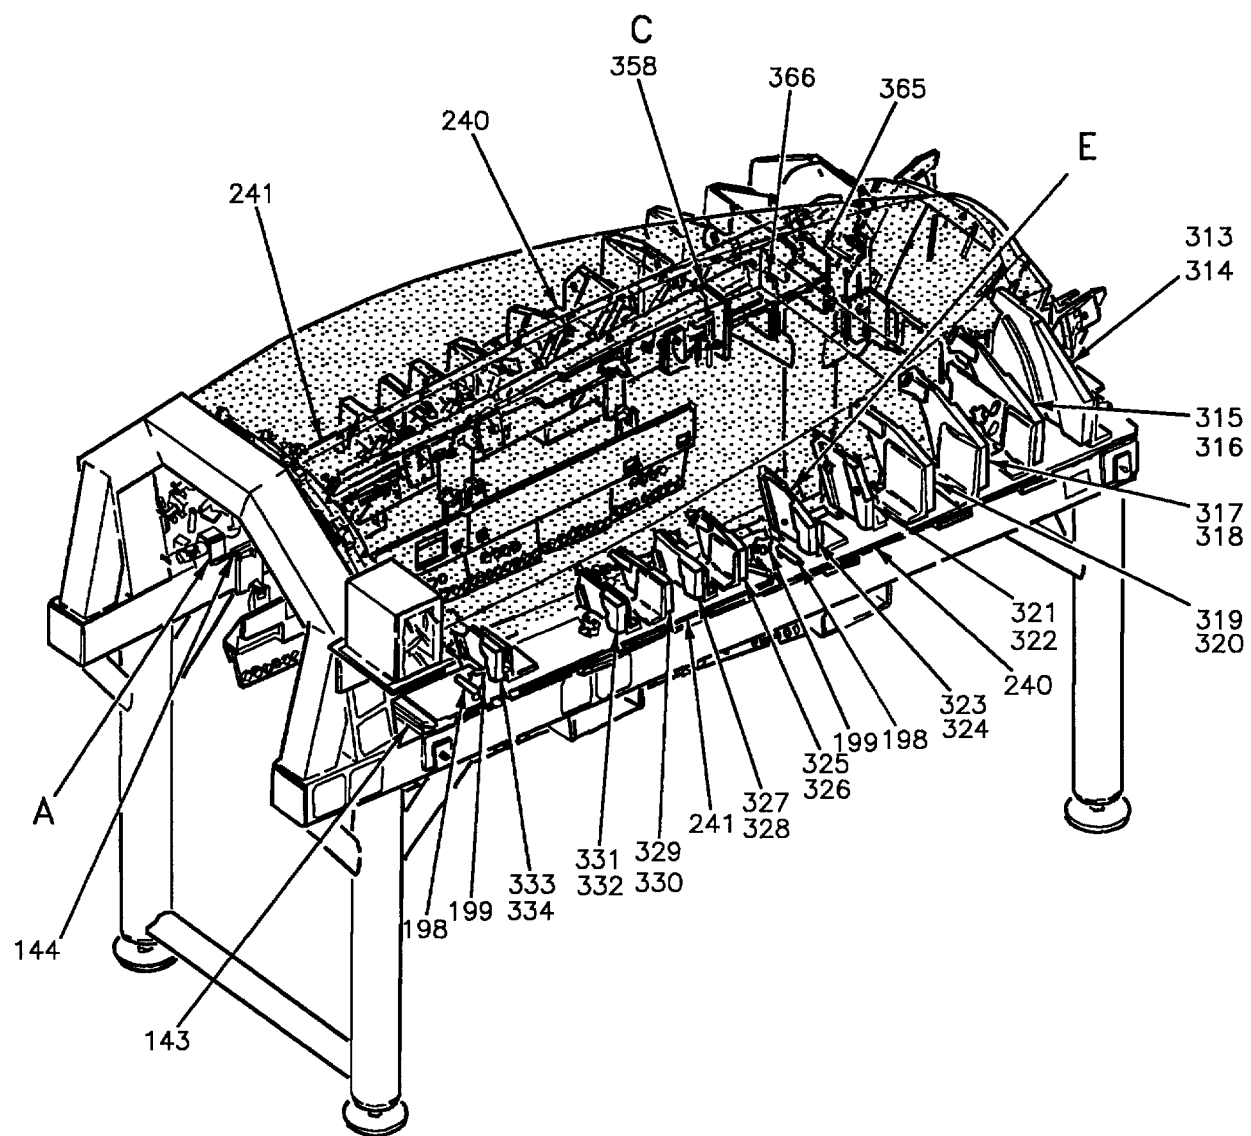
Inspection or Replacement - Lower Fairing Support (Sheet 1)
